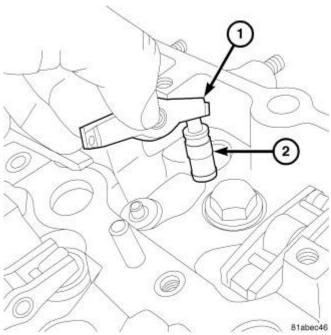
ROCKER ARM AND LIFTER ASSEMBLY Courtesy of CHRYSLER LLC
